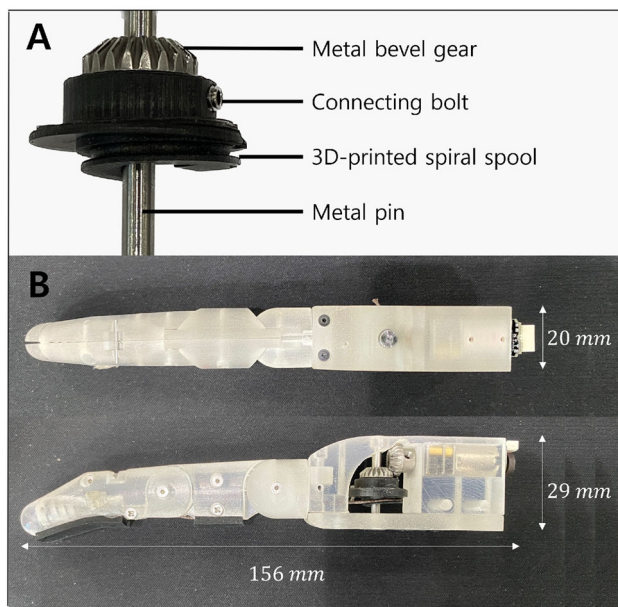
PDVT finger fabrication. a Spiral spool fabrication. b PDVT finger fabrication
